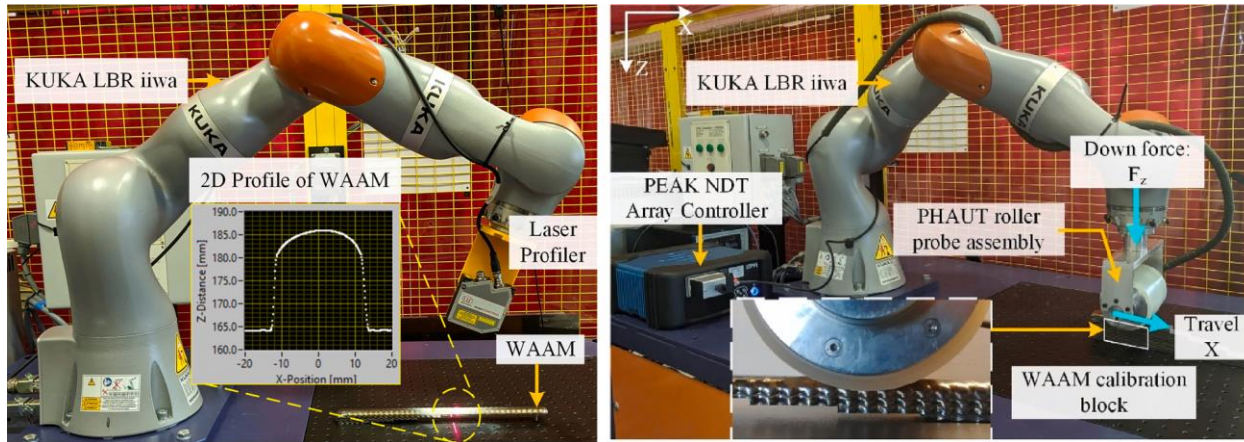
(a) Quantification of wire arc additive manufacturing (WAAM) lateral curvature using a 2D laser profiler and (b) experimental setup illustrating PAUT roller probe, array controller, Ti-6Al-4V WAAM calibration block with 1 mm flat-bottom hole (FBH) and industrial robot with built-in force-torque control capability [296].
